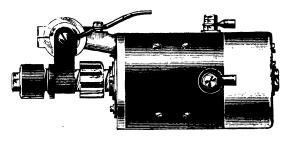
The Lucas Magnetic Damping Device for Starter Drive.
